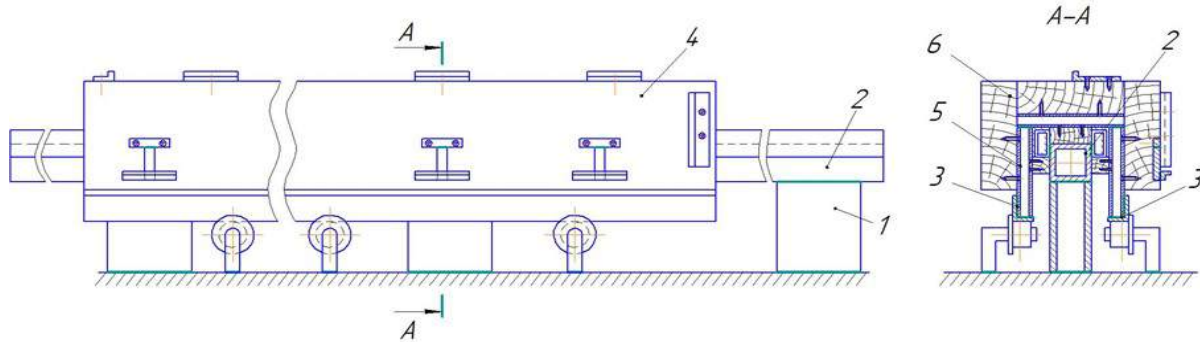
The design of the feeding carriage of the S20PK four-side peripheral -milling machine
